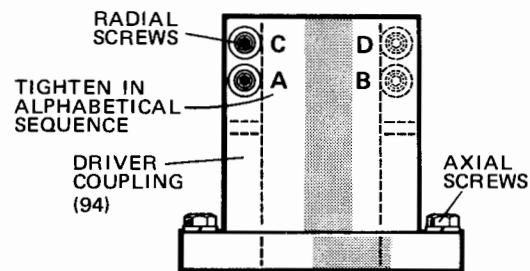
B — HOLD SHAFT IN PLACE WITH WRENCH WHEN TORQUING
